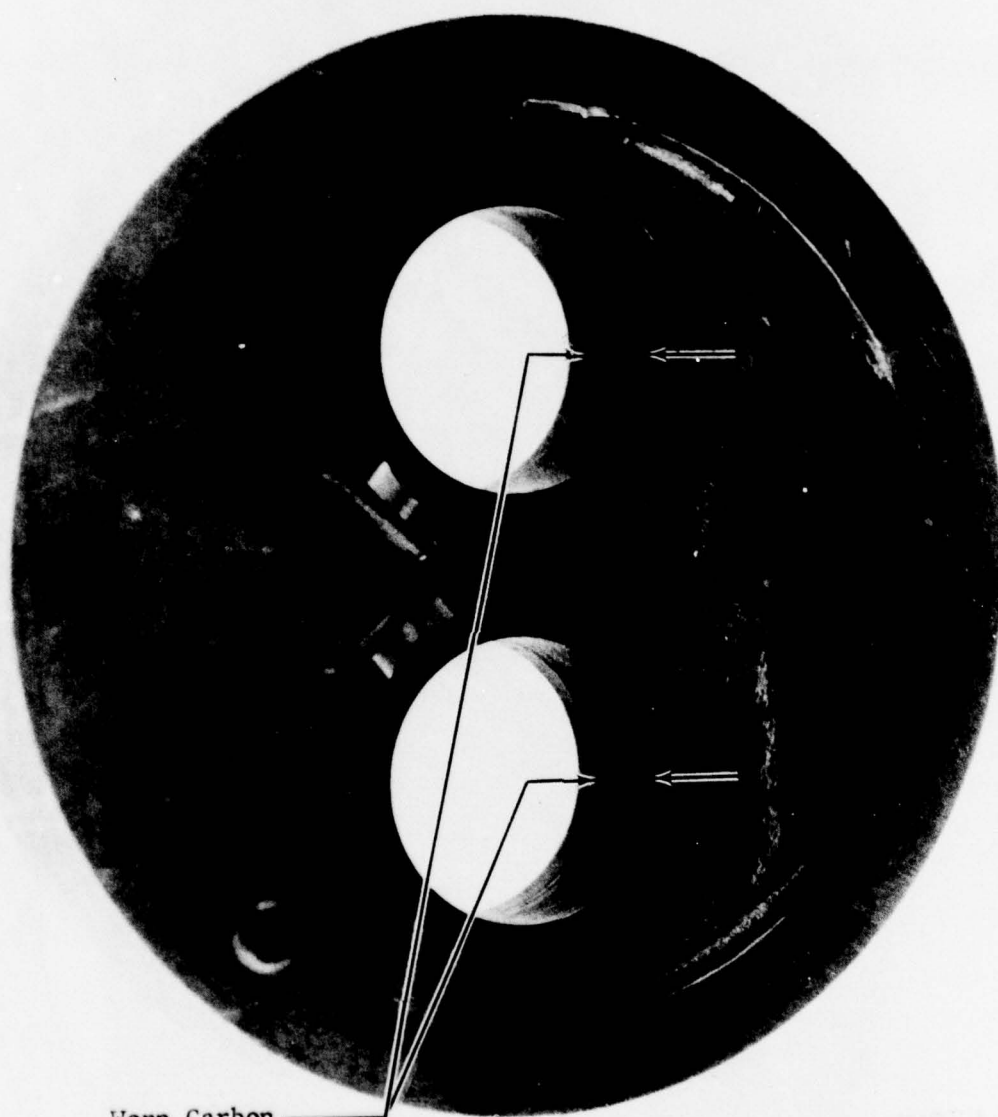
Supply Pump Rear Bearing Assembly Package No. 2
